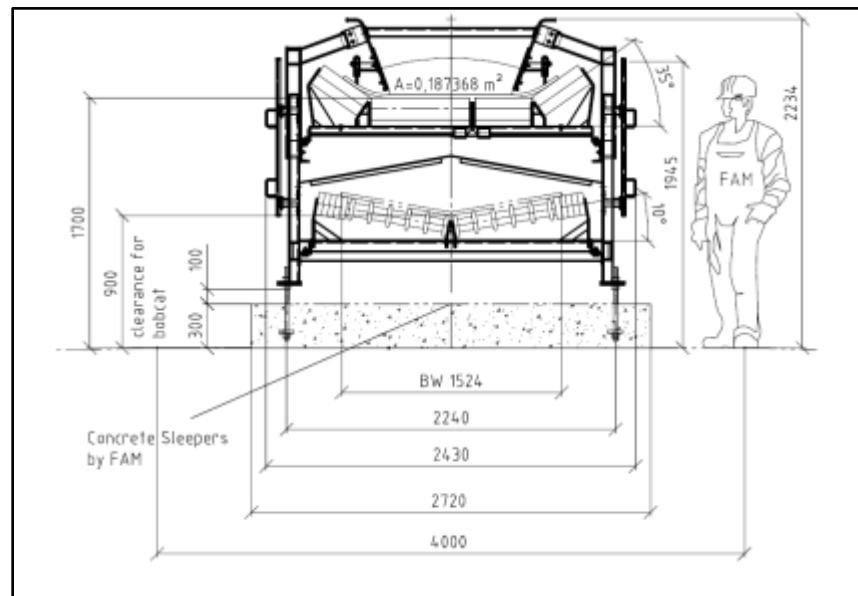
Cross Section of Existing Reclaim Conveyor
